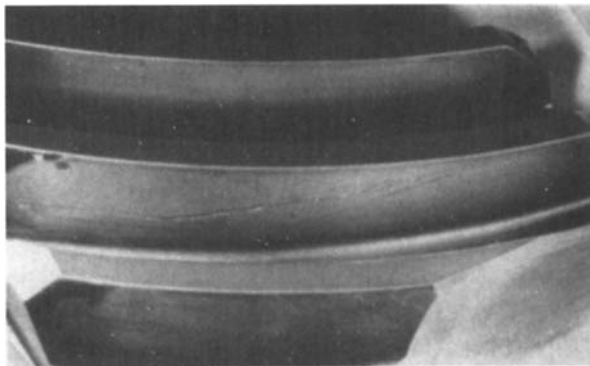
Illustration of case crushing of a carburized bevel gear. (Courtesy of American Gear Manufacturers Association.)
